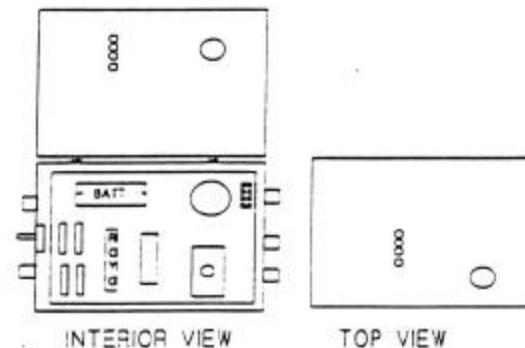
Layout of the Rainbow pcb in the mint tin enclosure
